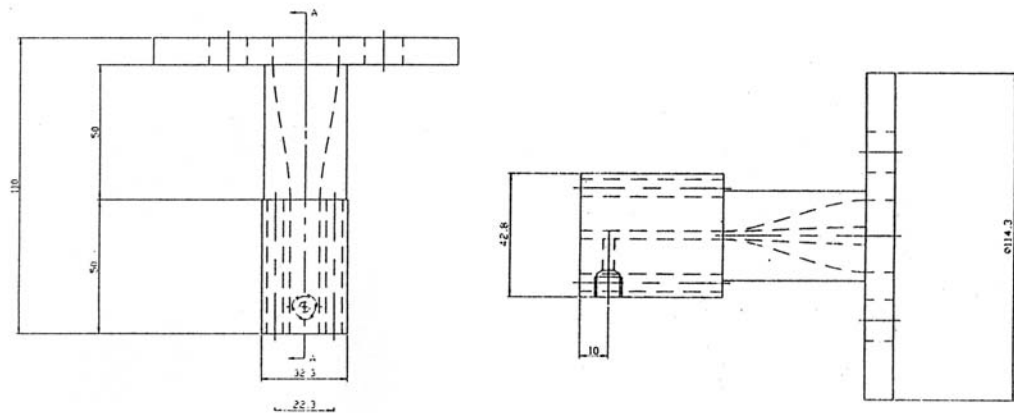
Plan view (left) and side elevation (right) of outlet transition
